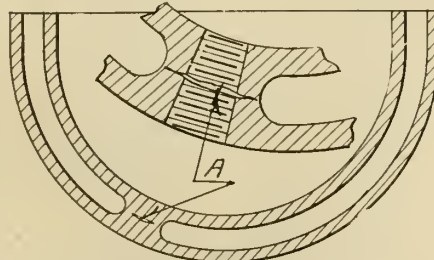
SHOWING CHECK IN BOTTOM OF JACKETED KETTLE.
